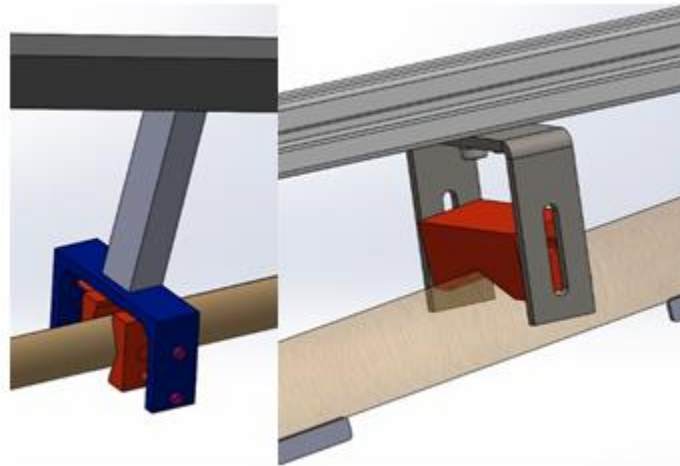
a)Self-Centering Clamps b)Single V-Block Fixtures
